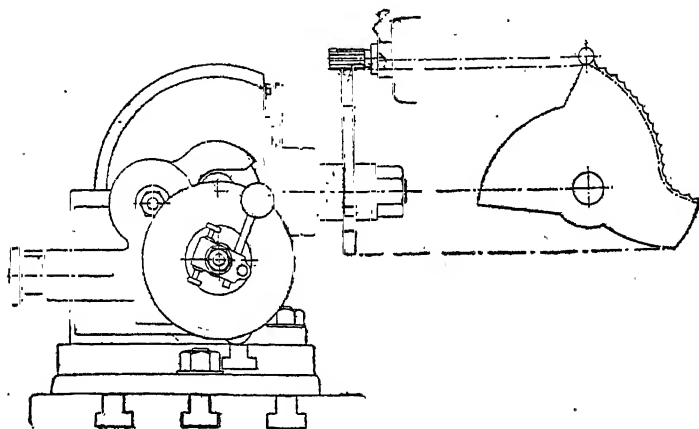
Method of milling cam by intermittent settings of table and index spindle.
